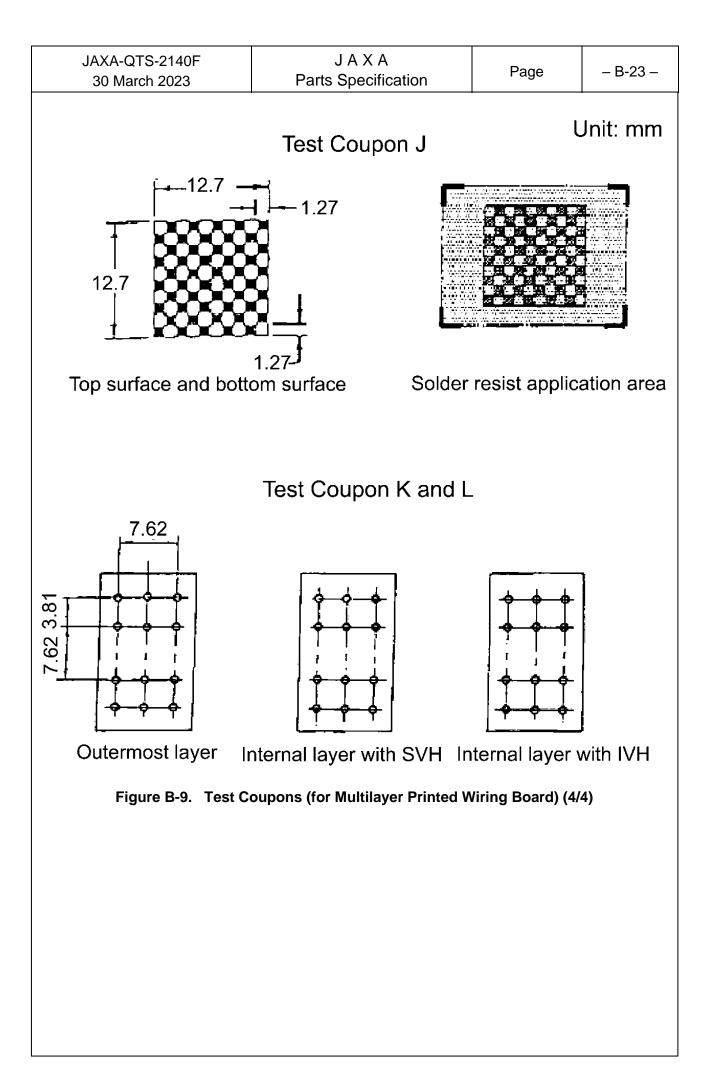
Test Coupons (for Multilayer Printed Wiring Board) (3/4)
